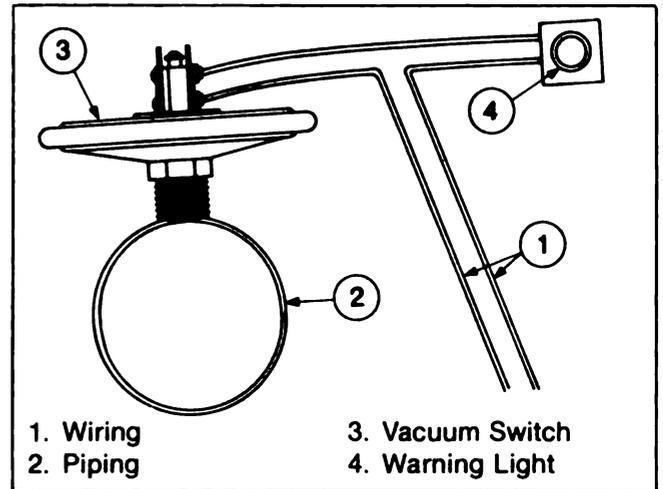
(N21905). Vacuum switch to check air inlet
